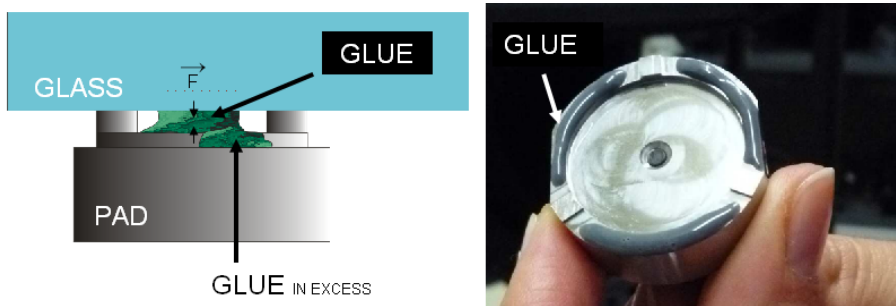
The gluing concept is to keep in touch the upper edge of the invar pad and the backside of the mirror. The glue is placed on the lower edge of the pad but thanks to the surface tension it can reach the glass surface and start curing. The contraction of the glue produce a sort of preload (\vec{F}). The pre-load on a small area maintain in contact the pad and the mirror without introducing mechanical stress.
